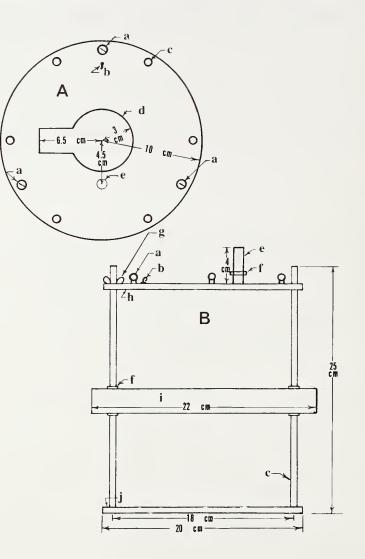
Stainless Steel Drop Sampler. Detailed views of side and top plate. (A) Top plate. (a) Eye hook for attaching chain to top plate; (b) Spring hook; (c) Six holes drilled so that stainless steel threaded rod (1/4 in) passes through; (d) Hole for neck of bottle; (e) Stainless steel threaded rod (3/8 in) for attaching bottle closure unit. (B) Side view. (a) Eye Hook; (b) Spring hook; (c) Six stainless steel threaded rods (1/4 in) welded to bottom plate - Two shown; (e) threaded rod (3/8 in); (f) Nut; (g) Wing nut to clamp top plate; (h) Stainless steel (1/4 in) top plate; (i) Teflon bumper ring (l in); (j) Stainless steel (1/4 in) bottom plate.
